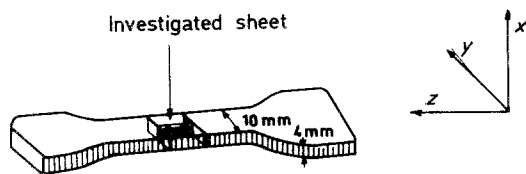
Schematic drawing of a 40 μm thick microtomed cut from the centre of the normal injection moulding used for birefringence measurements.
